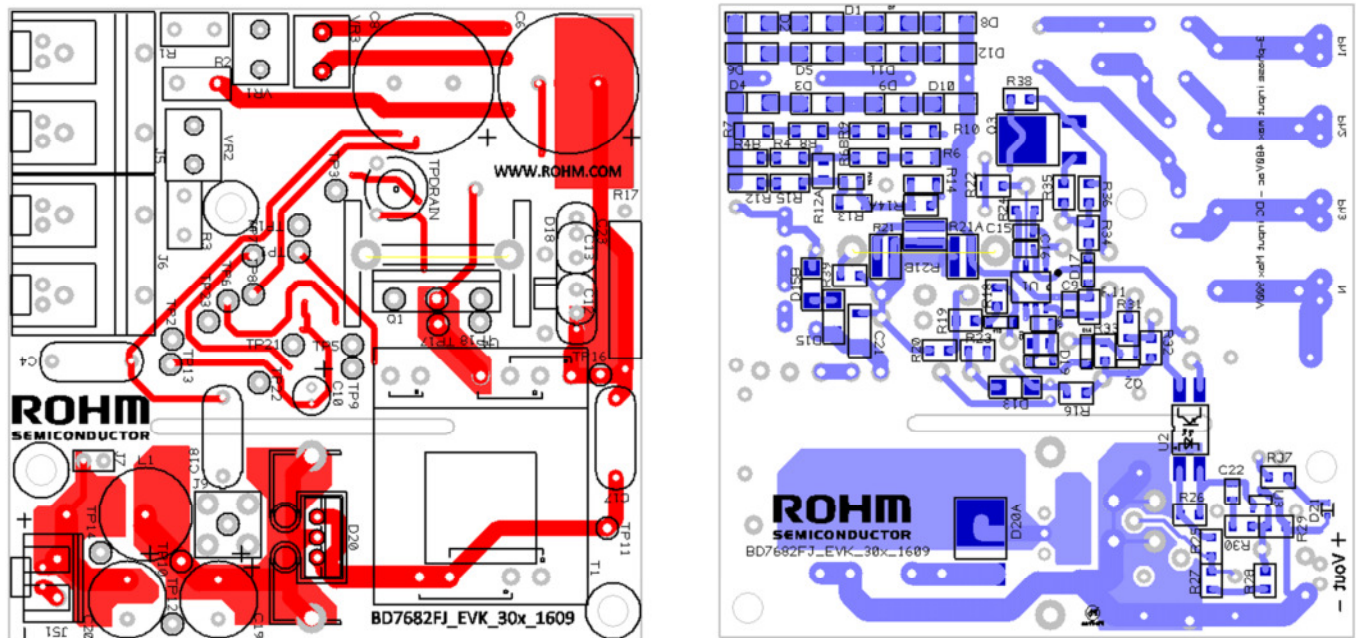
Layout of top side (left) and bottom side (right) of the AUX board.
